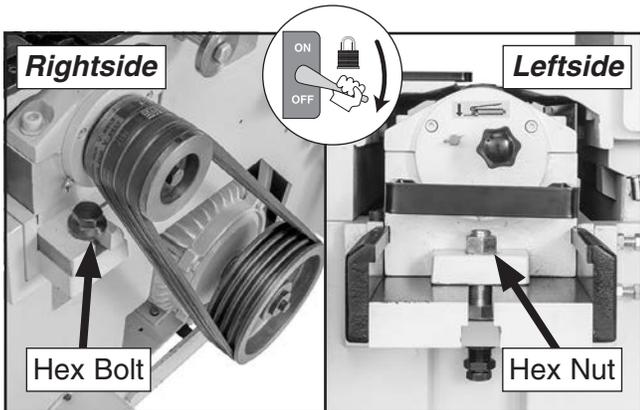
Location of lower cutterhead hex bolt and hex nut.
